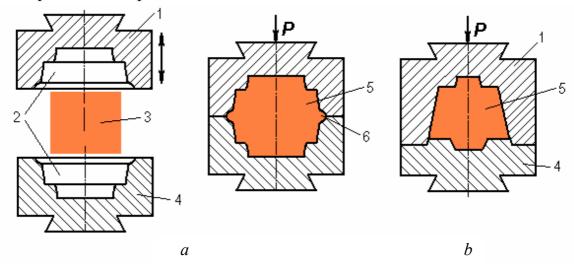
Scheme of open die forging (a) and closed die forging (b): 1 – top die; 2 – hollows; 3 – billet; 4 – bottom die; 5 – stamp cavity; 6 – fin groove
